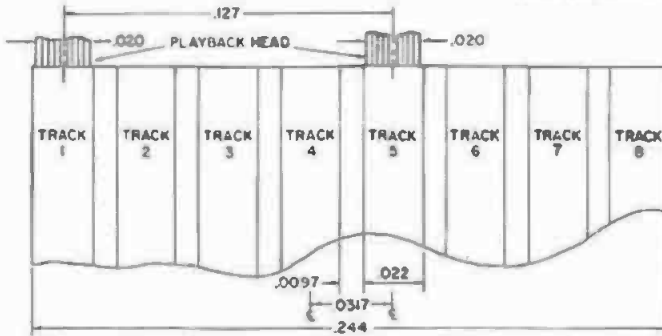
A. Sound track placement dimensions for Lear-Jet Corp. (Stereo Div.) eight-track stereophonic automobile tape reproducer.
